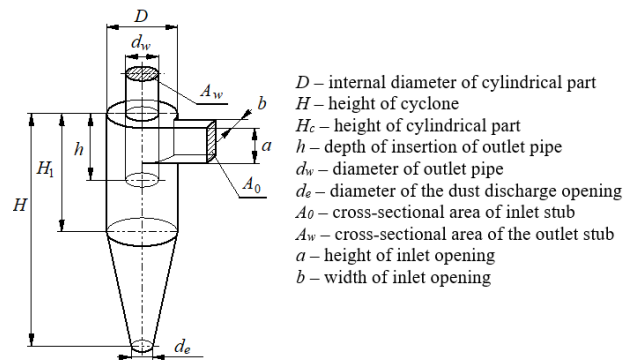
Typical dimensions of a reverse cyclone with tangential inlet
